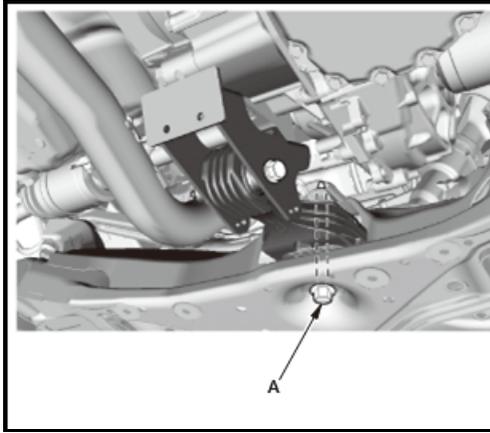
Torque Rod Mounting Bolt With Torque Specifications (AWD)
